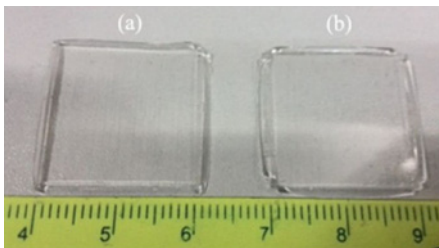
The photograph of embossed PMMA workpieces (a) without clamp, (b) with clamp
